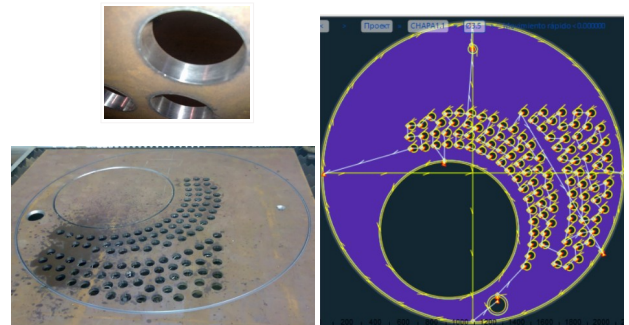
Project (right) and tubular mesh (left) processed with combined plasma bevel cutting and boring holes
